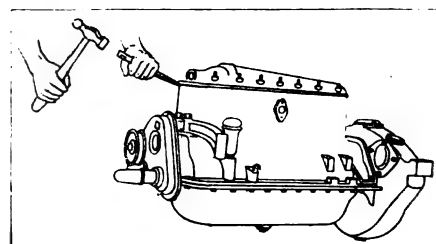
The Hammer and Chisel Method of Removing Cylinder Heads, Which Is Injurious to the Gasket.
